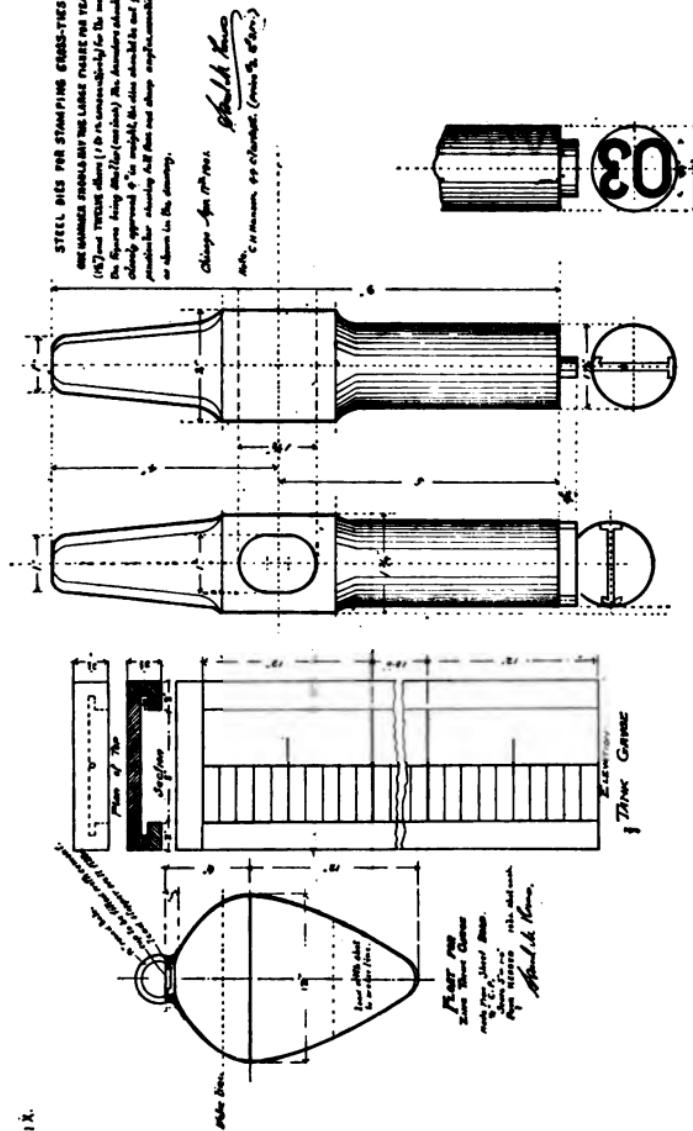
STAMPING HAMMER INDICATOR, BOARD AND FLOAT.
